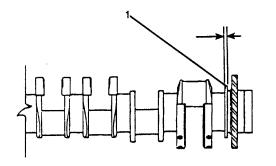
<u>Crankshaft Thrust Flange</u> <u>Measurement.</u>
